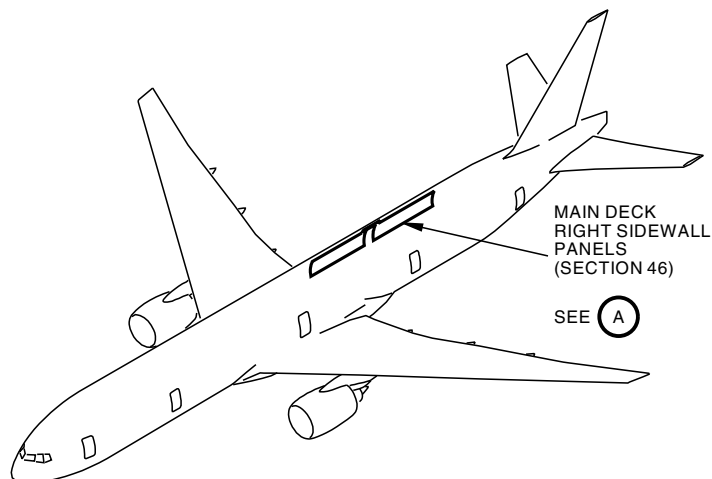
ZONE 242 PASSENGER CABIN SIDEWALL ACCESS PANELS
